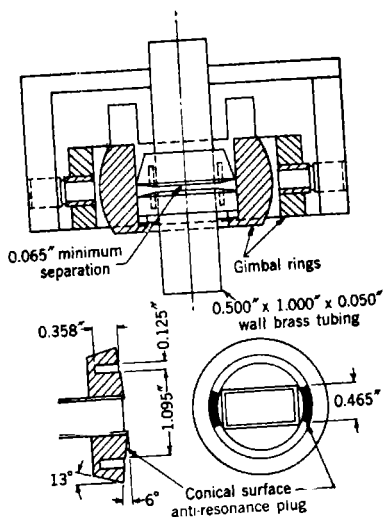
Choke-choke universal joint for 3-cm band.
